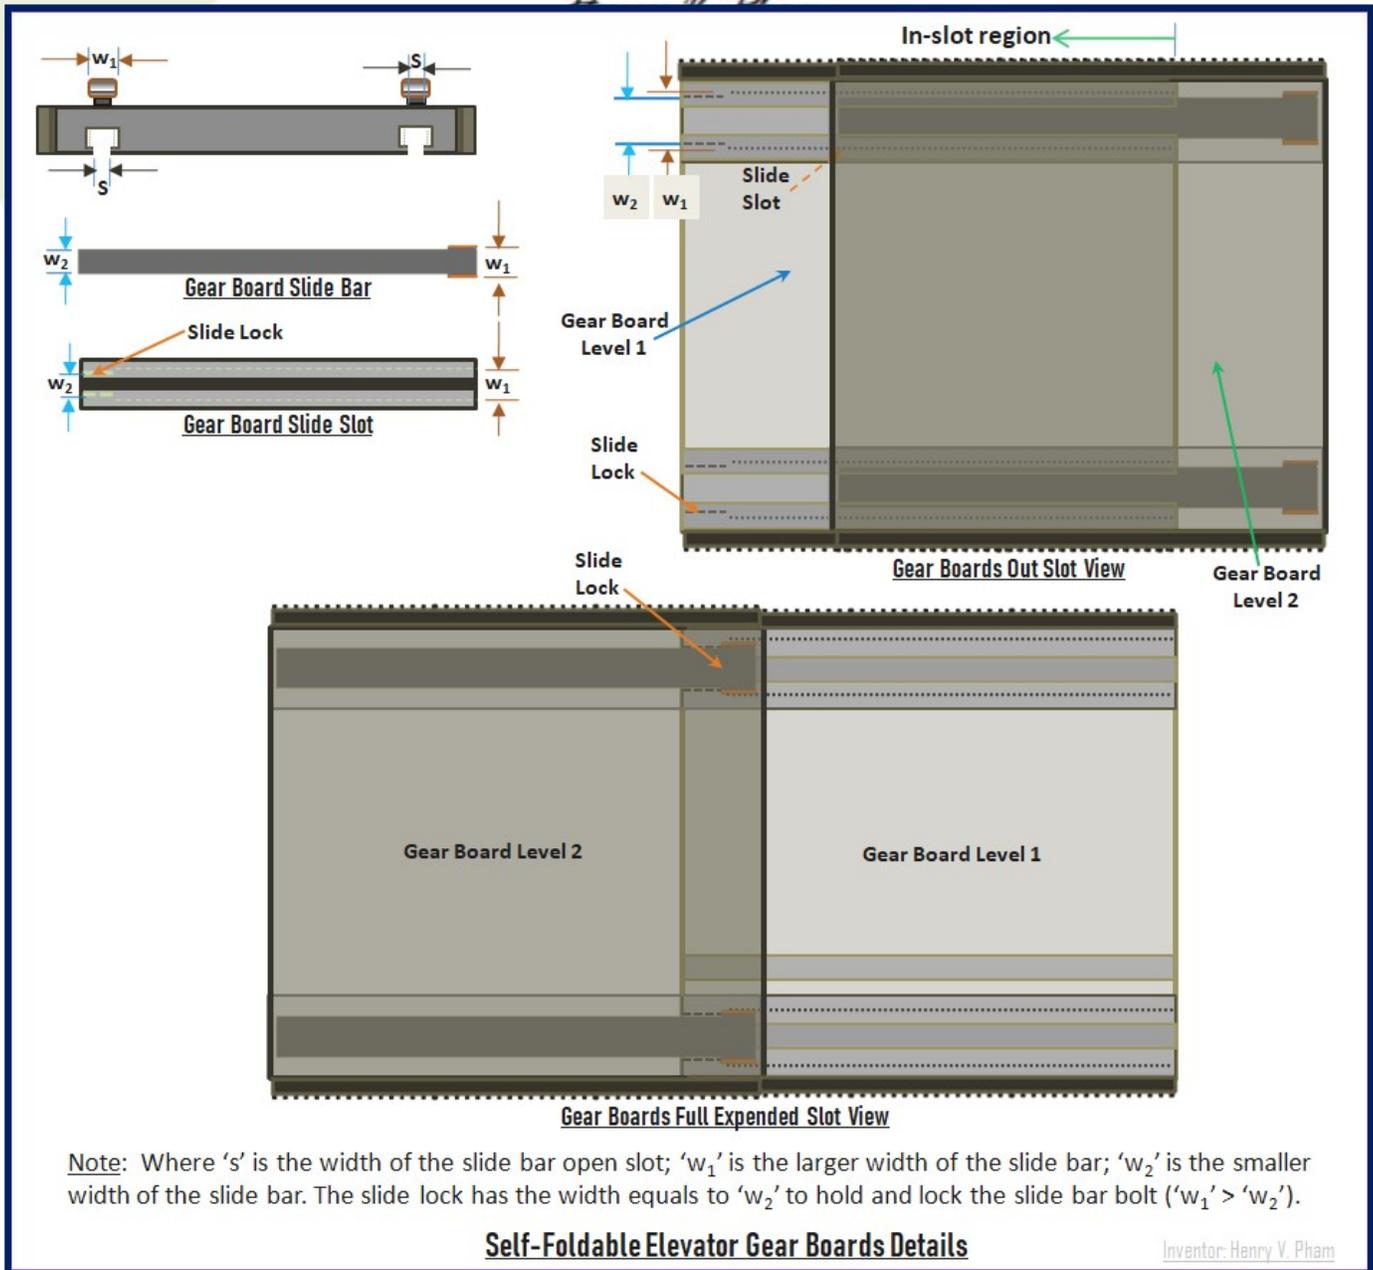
One Step Self-Foldable Elevator 2 Slide Gear Boards Operating Sample
